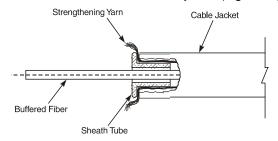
Sheath Tube Insertion for 3.0 mm Cable
